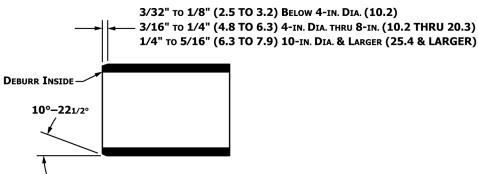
Chamfer and Deburring of Debur the Pipe Edges End
